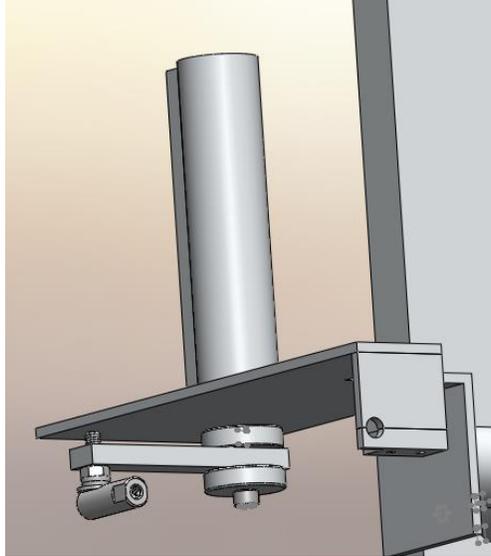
Roll Control Cable Connections on the Steering Wheel
